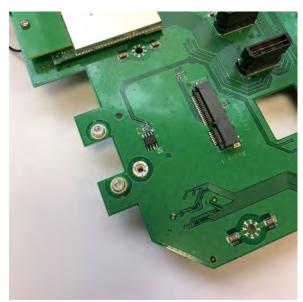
PCIe Board PCB that accomodates the 802.11ac WiFi Radio Module - Samtec IP5 connectors
